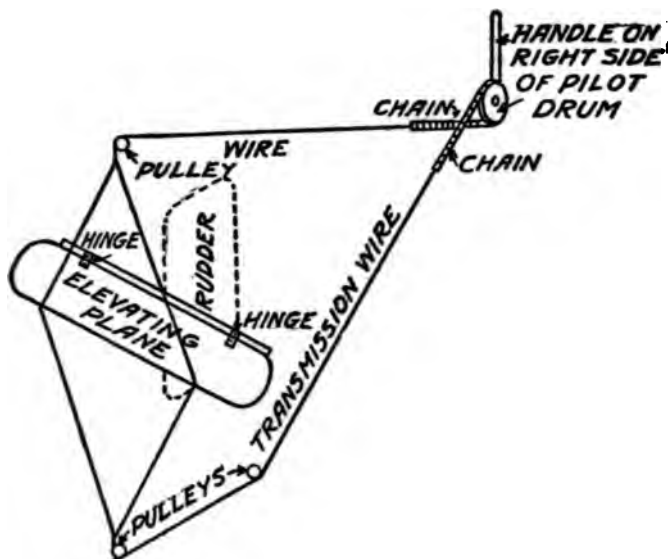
EARLY WRIGHT ELEVATOR CONTROL
